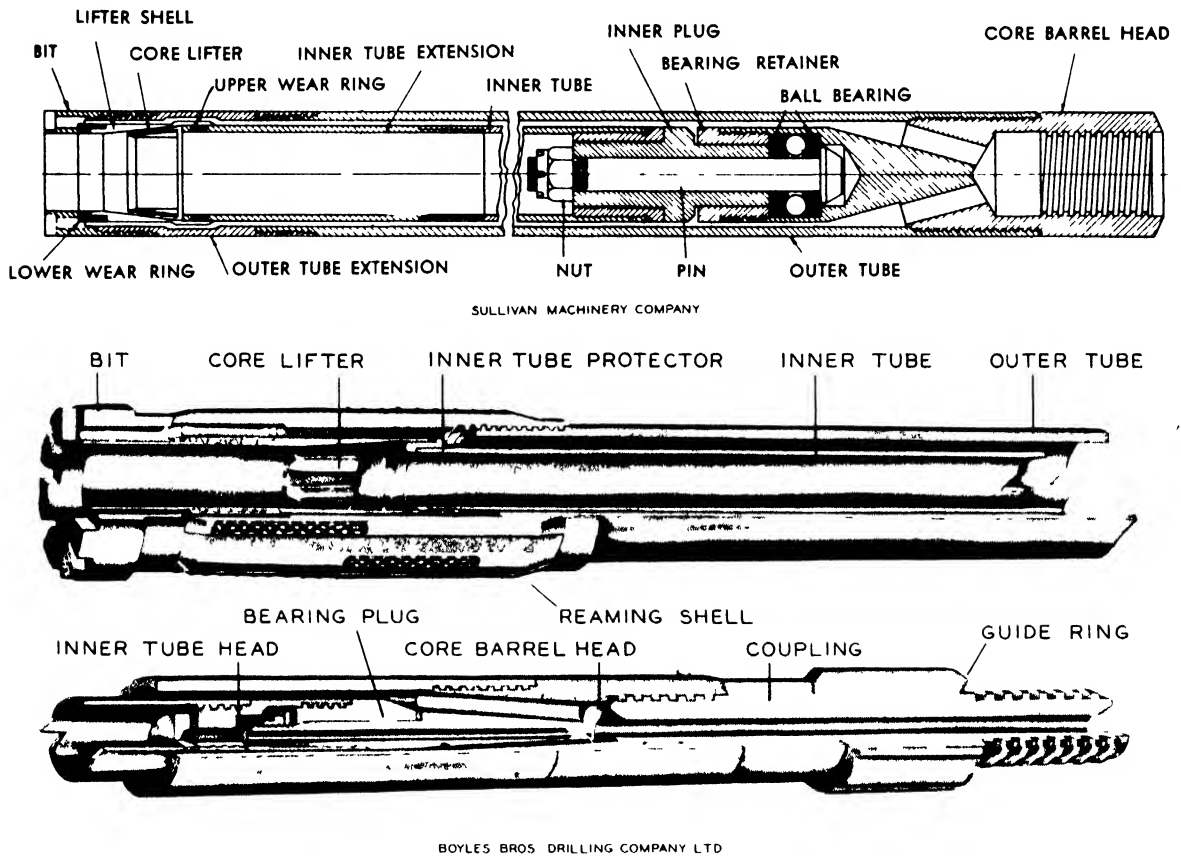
DOUBLE TUBE DIAMOND CORE BARRELS WITH BOTTOM DISCHARGE
